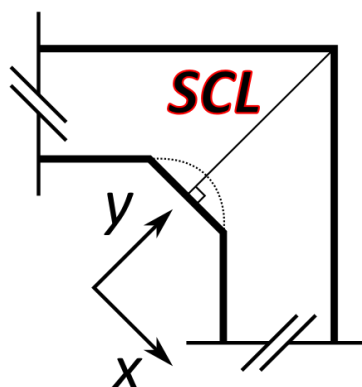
Illustration of a diagonal SCL and weld bead configuration
